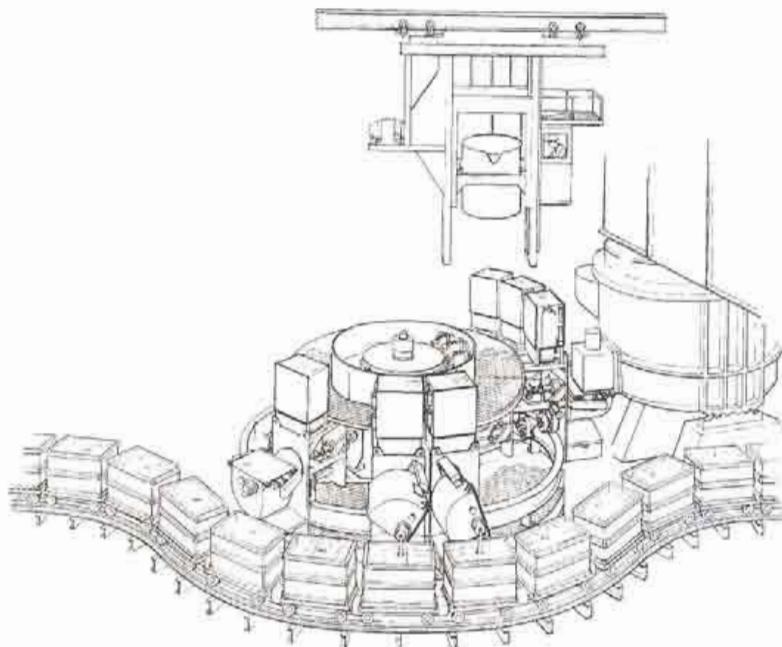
Automatic pouring of molds on a conveyor line. (Courtesy of Roberts Sinto Corporation, Lansing, MI.)
